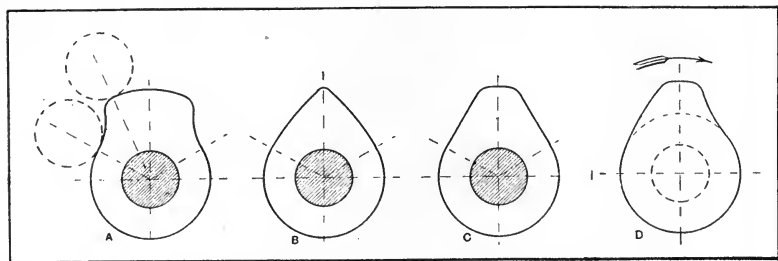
Forms of Valve-Lifting Cams Generally Employed. A—Cam Profile for Long Dwell and Quick Lift. B—Typical Inlet Cam Used with Mushroom Type Follower. C—Average Form of Cam. D—Designed to Give Quick Lift and Gradual Closing.
